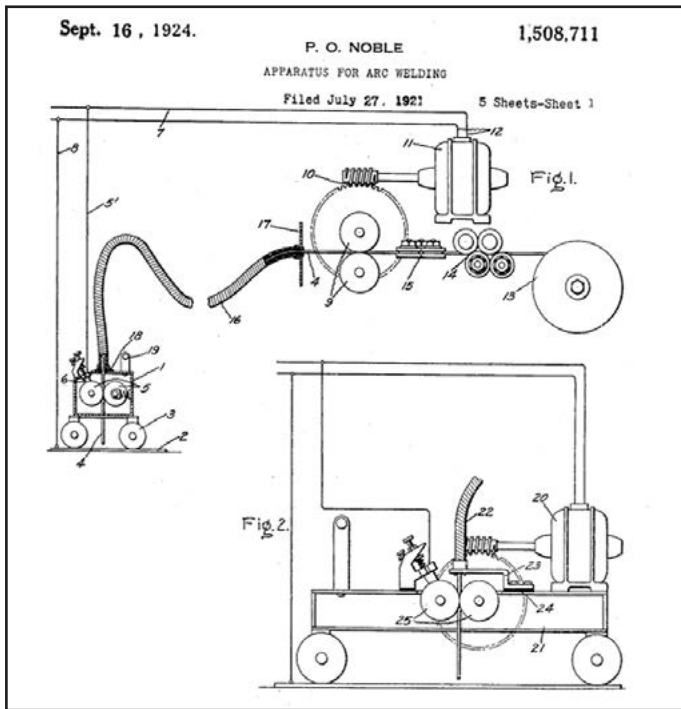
Scheme of the arc welding machine according to US patent no. 1,508,711 [5]
